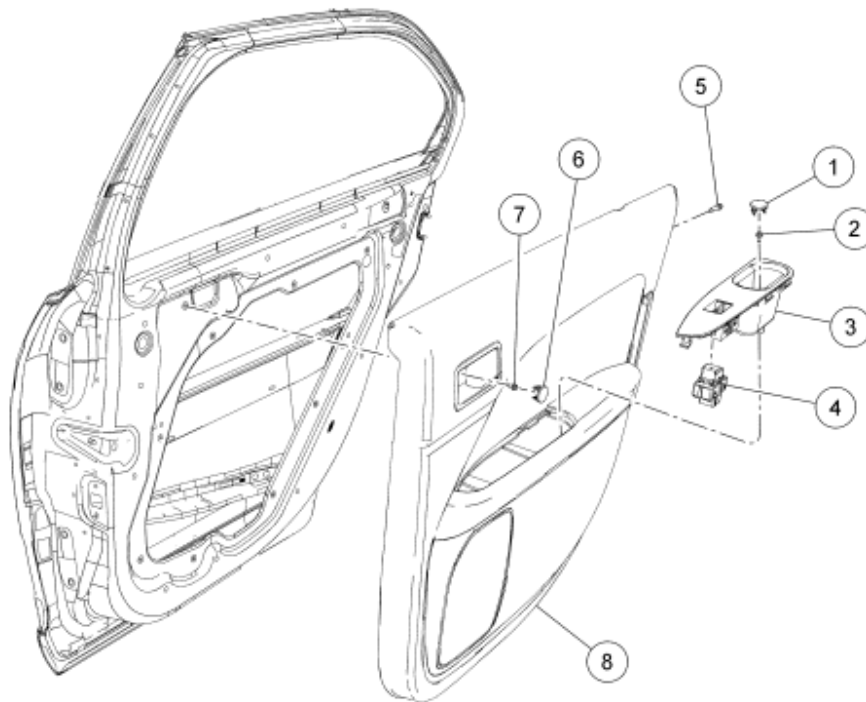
Locating Front Door Trim Panel Pin-Type Retainers
